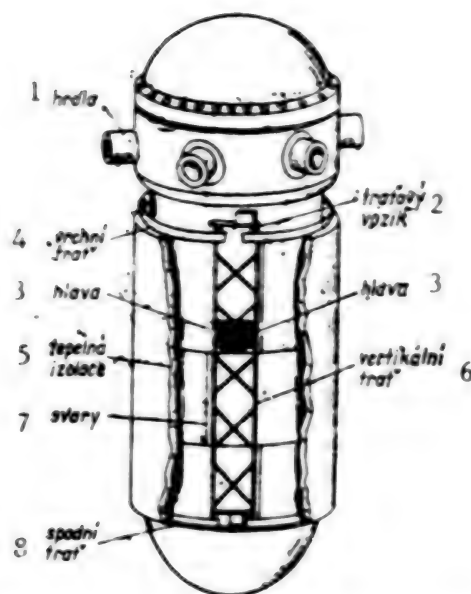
Babcock and Wilcox Internal Inspection System
